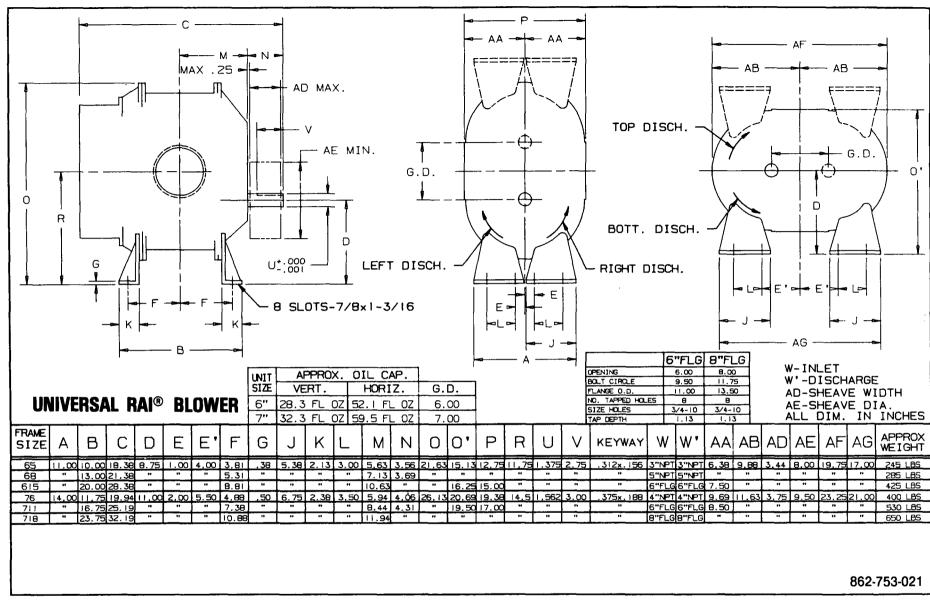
Dimensional Assembly of UNIVERSAL RAI® Blower (6" & 7")
